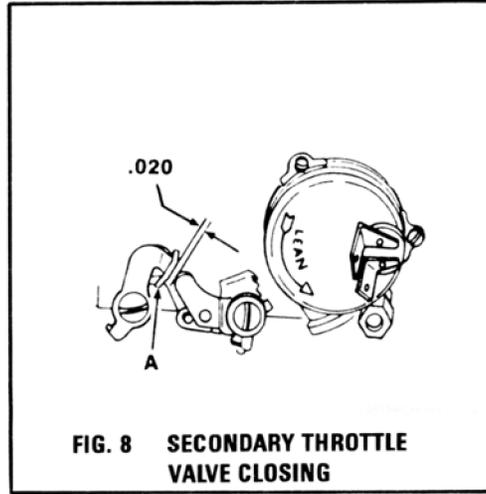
SECONDARY THROTTLE VALVE CLOSING
